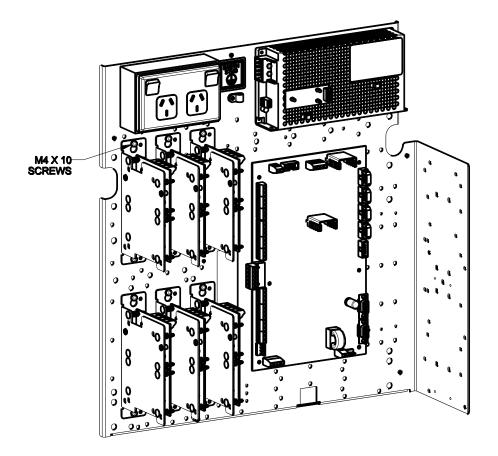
FP1027 Bracket Mounting Positions on a 15U MX1 Gear Plate
